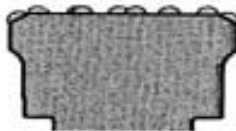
Air hammer bit face profile design, flat face bit (courtesy AB Sandvik Rock Tools).
